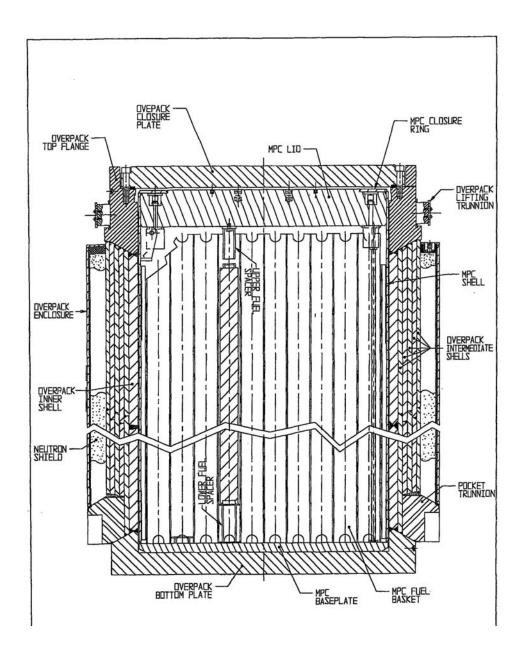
; CROSS SECTION ELEVATION VIEW OF HI-STAR 100 SYSTEM
